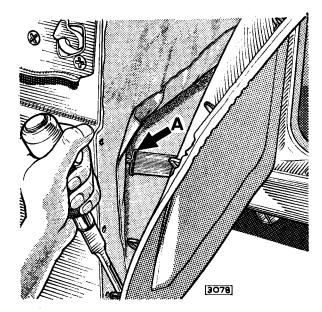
Removal of the door trim casing. Arrow "A" shows the location of the map pocket tensioner anchorage
